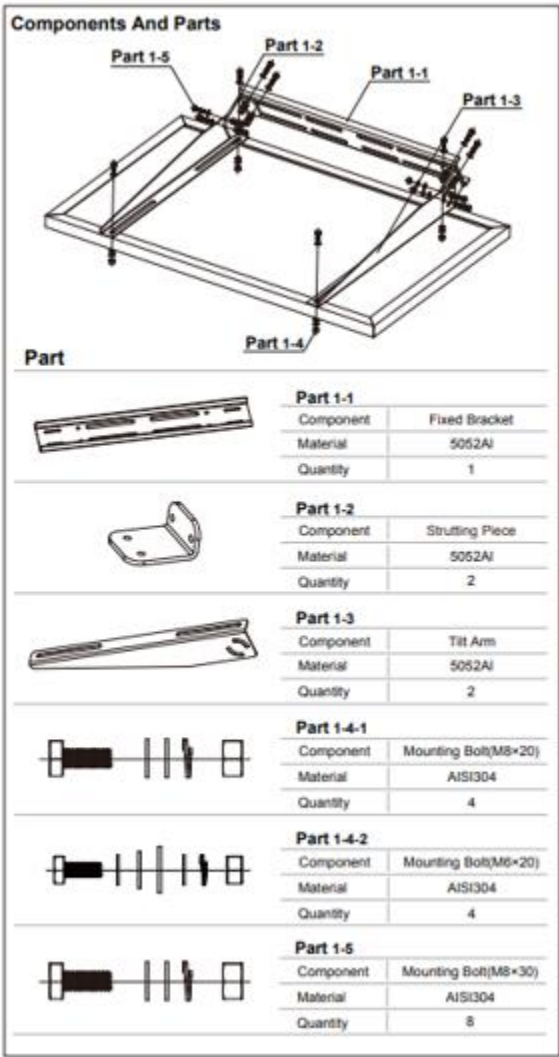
LEFT: Solar Panel Mounting Bracket Parts and Assembly
